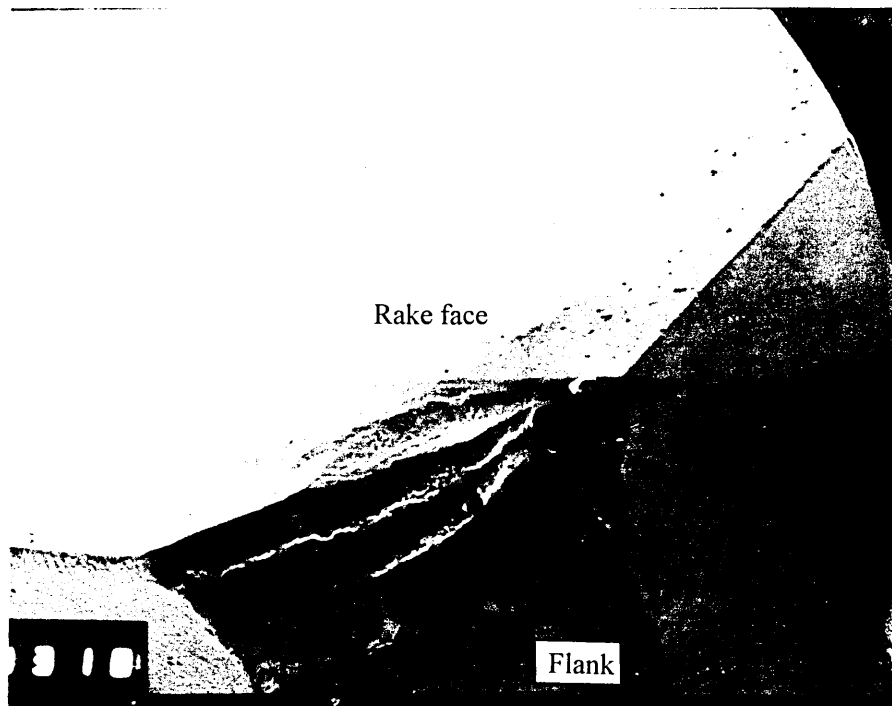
The cutting edge chipping on roughing tooth produced when sawing 302S25 stainless steel with segment type B2
